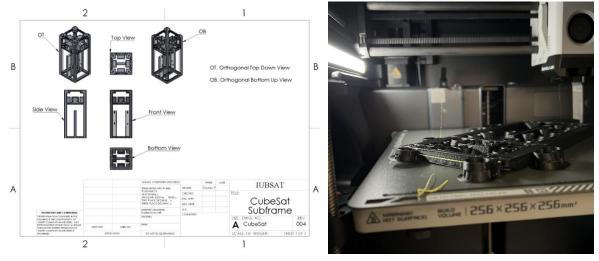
(LEFT) Subframe REV-004 Engineering Drawing (RIGHT) Print failure due to warping
